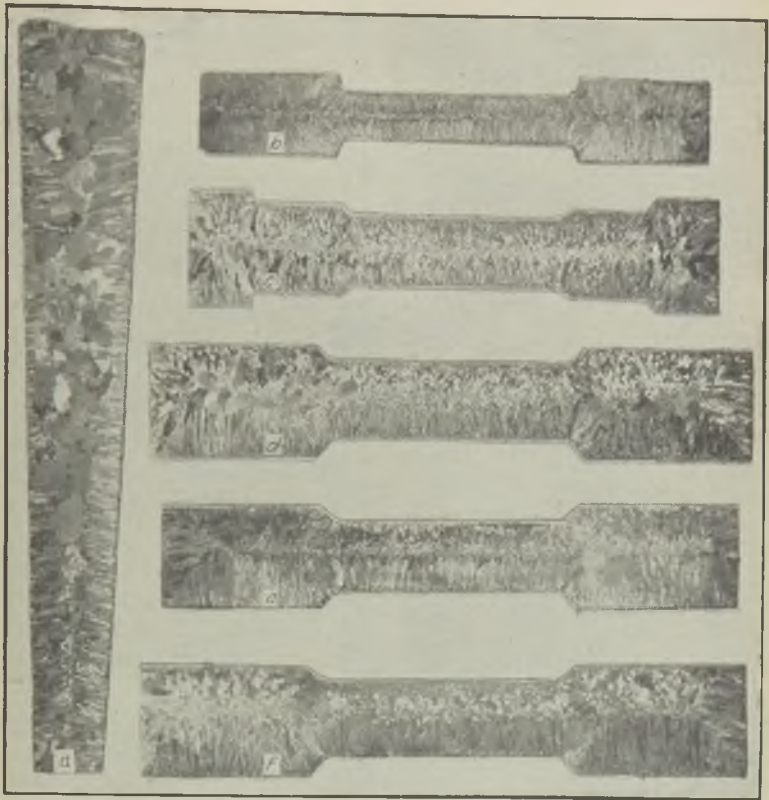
MEDIAL LONGITUDINAL SECTION OF TEST-BARS OF VIRGIN METAL, CAST AT 1,260 DEG. C., THE SECTION BEING PERPENDICULAR TO THE PARTING FACE OF THE SAND MOULD.
